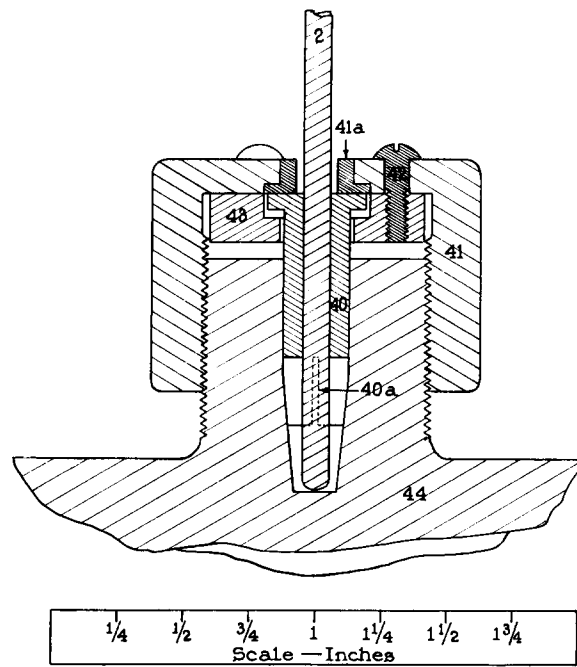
Vertical cross-sectional view of the rotor chuck arrangement.
